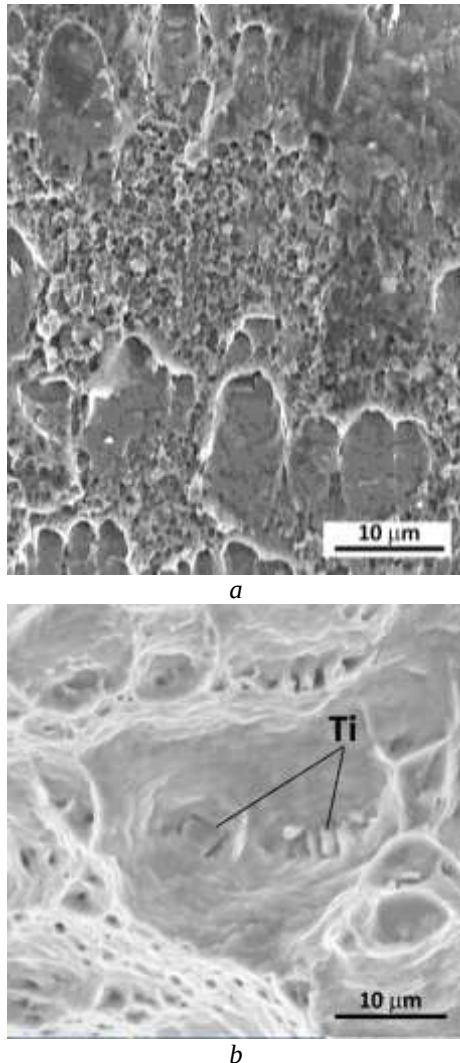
Fracture surfaces of 08Kh18N10T steel: morphology (a), surface section containing TiN inclusions (b)
